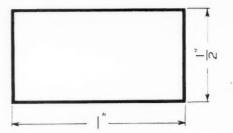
Diagram of test specimen died from 0.075-inch tensile test sheet
